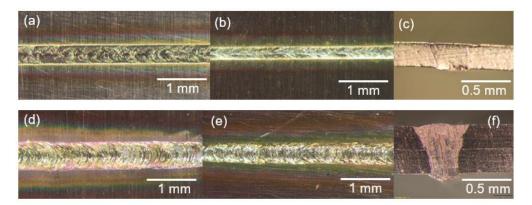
(a)-(c) Bead on plate and heat conduction welding of Cu foil (material thickness=0.25 mm, v=10 m/min, BD=0.51 mm): (a) top side, (b) bottom side, (c) cross section; (d)-(f) overlap and deep penetration welding (material thickness=2×0.25 mm, v=8 m/min, BD=0.316 mm): (d) top side, (e) bottom side, (f) cross section
